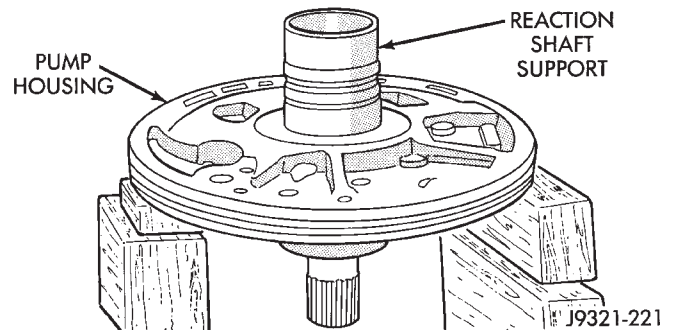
Supporting Pump And Installing Outer GearFig. 127 Pump Inner Gear Installation
